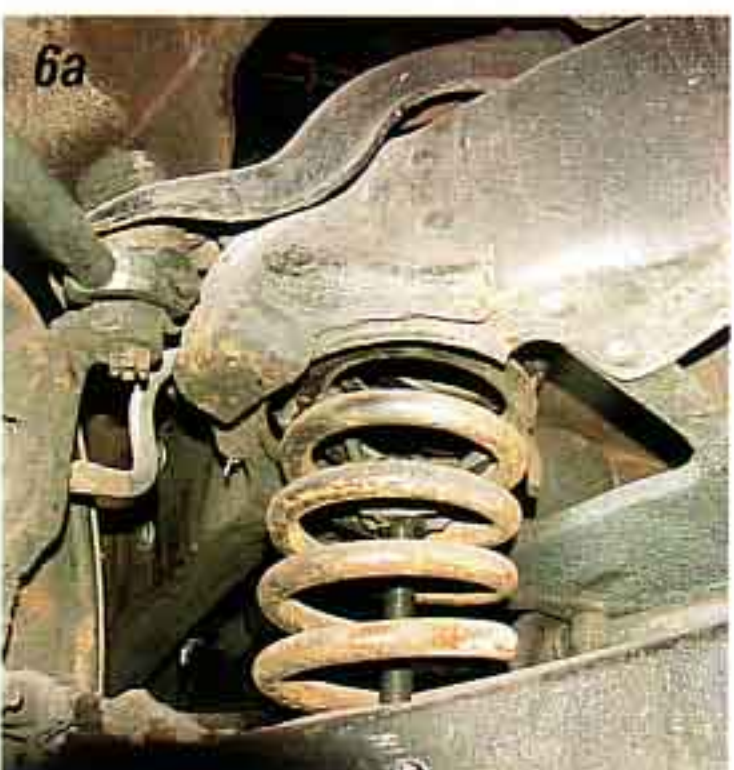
& 6b: With the load off of the control arms, remove the cotter pins and loosen the nuts on the upper and lower ball joints. Using a ball joint pickle fork, disconnect the spindles from the ball joints. By keeping the nuts on the ball joints, the spindle will be held in place and not violently separate from the ball joints. Now remove both ball joint nuts and the spindle assembly can be removed.
